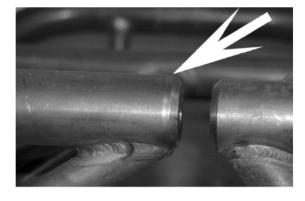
Interim redesign Engine Mount One (1) Piece Machined Foot
